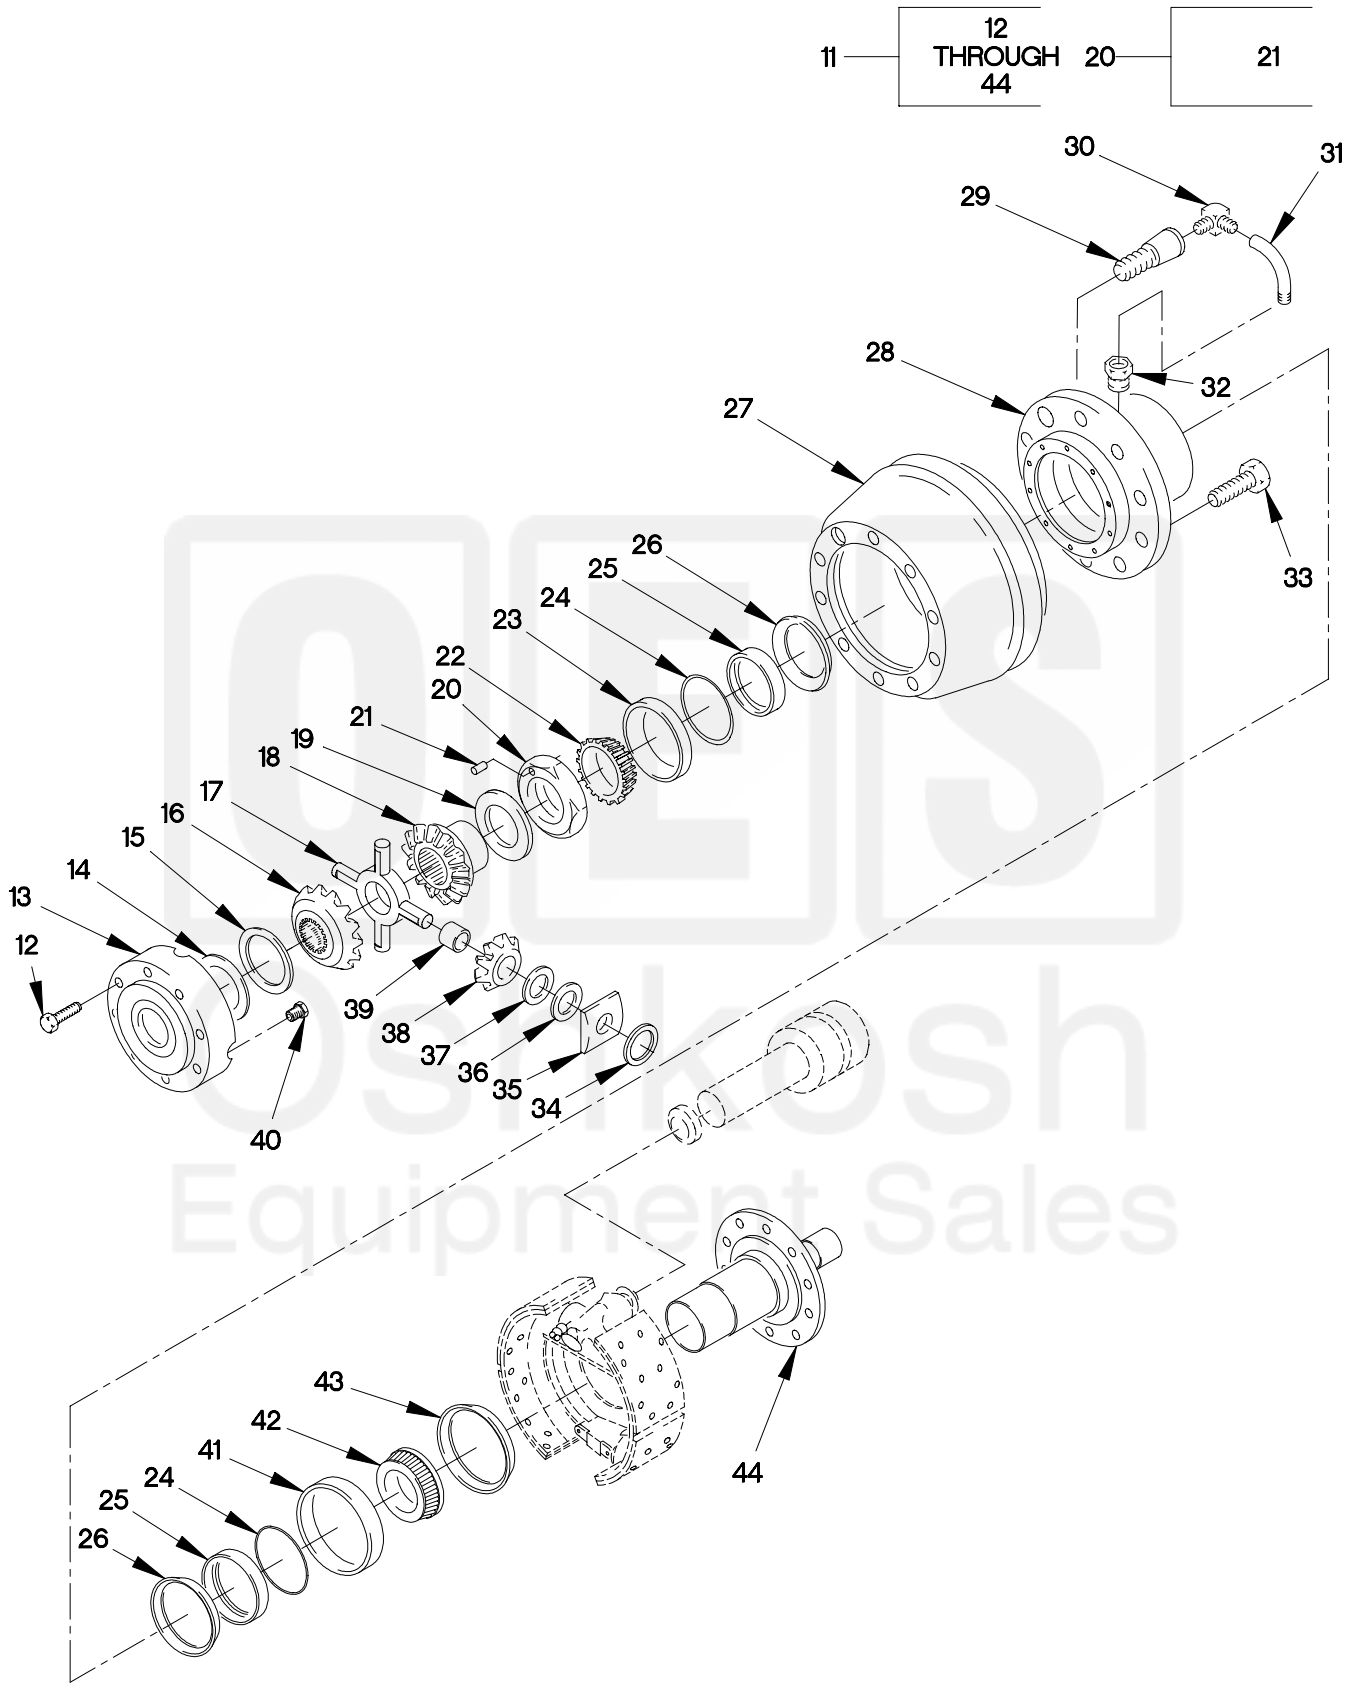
REAR AXLE AND WHEEL END ASSEMBLY (SHEET 1 OF 2)
